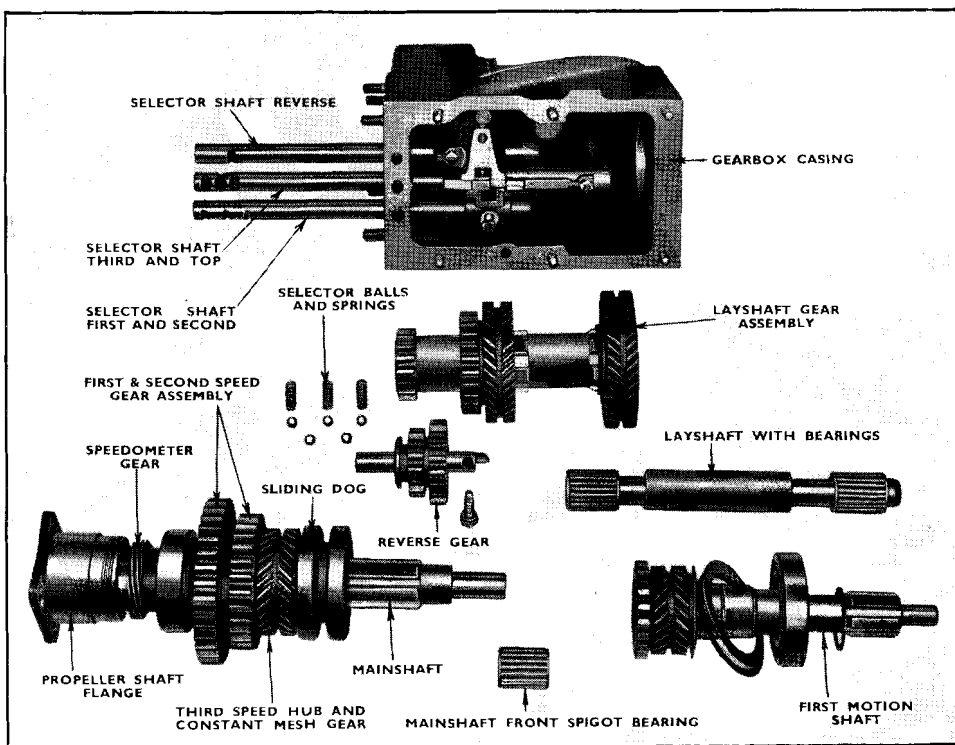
Illustration No. 34.—Components of the Crash type gearbox referred to in the text.
